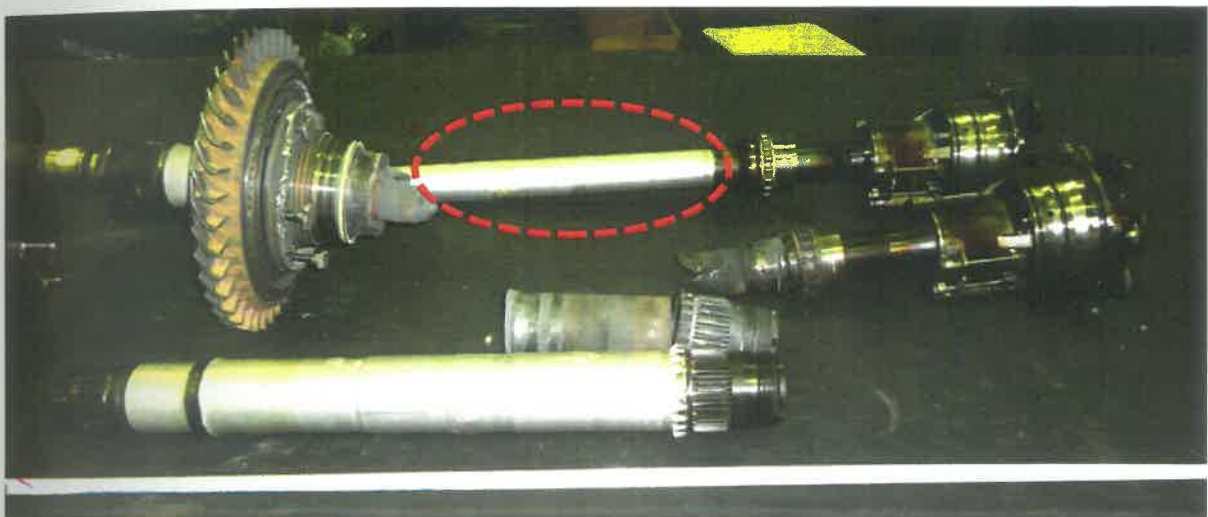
Serviceable PT shaft and damaged PT shaft.
